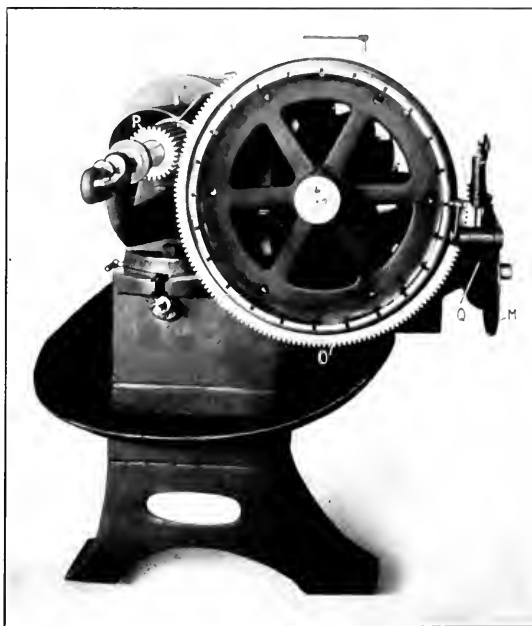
End View of Cleveland Automatic showing Regulating Drum and Auxiliary Mechanism for changing Feed of Tools
